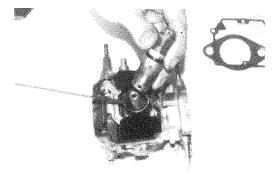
Fit the jet into the body of the carburettor in the sequence shown in fig 7. At this point, the assembly should only be screwed in loosely.
